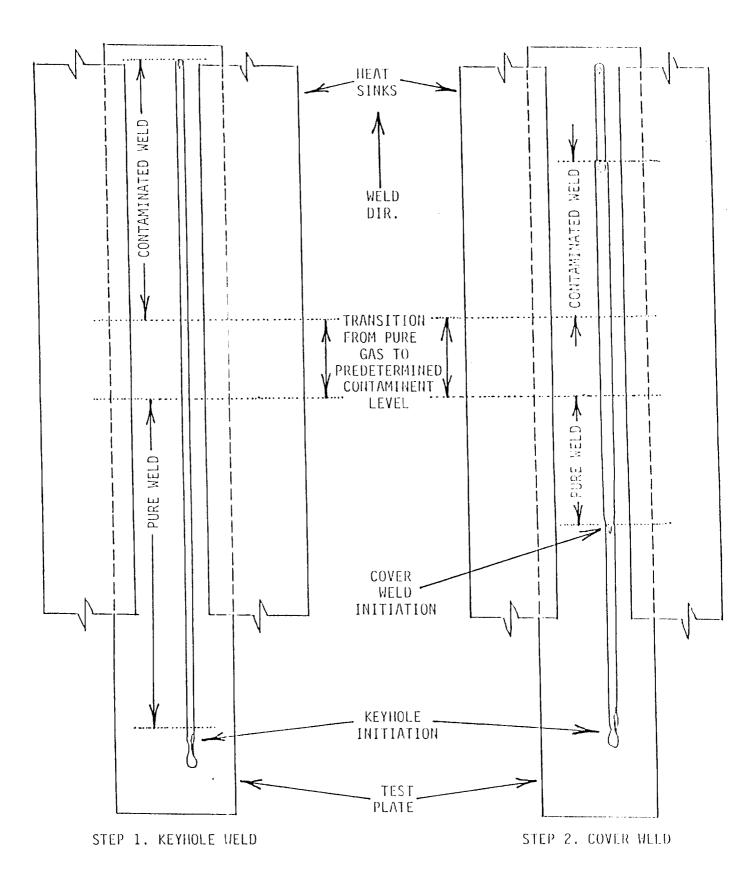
Weld test sheet showing location of pure and contaminated welds and position of keyhole and cover passes.
